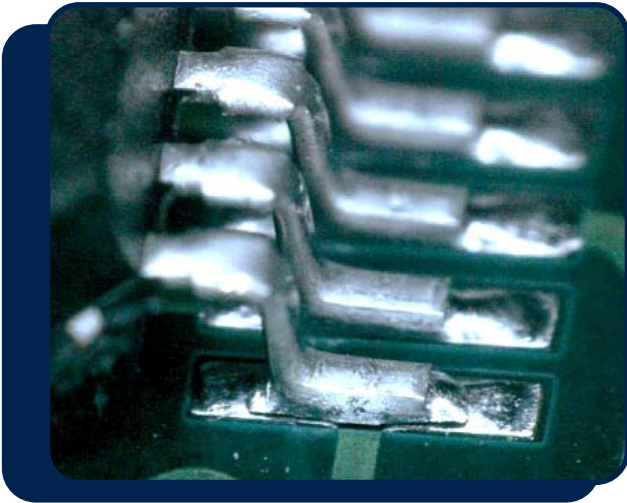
1 – Solder joint separation caused by black pad on an ENIG board.
